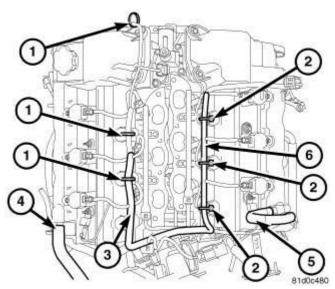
Engine Harness Retaining Clips Courtesy of CHRYSLER LLC
